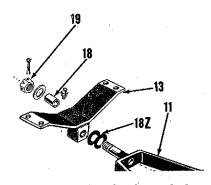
Pivot bracket, axle brace and attaching parts used on 444 Rice tractors. Remainder of assembly is similar to Fig. MH755.
